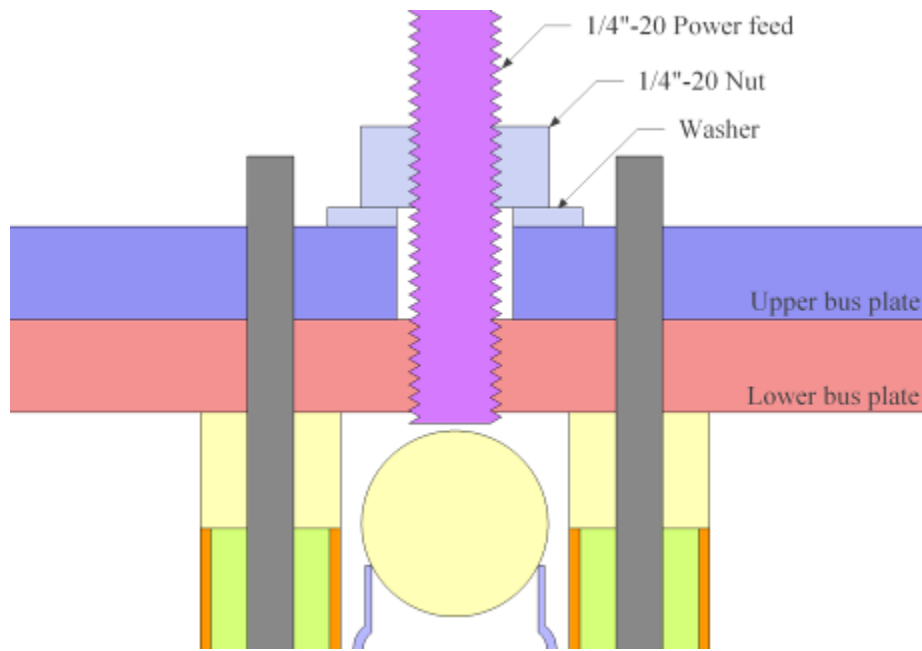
Cross-sectional detail drawing of the top electrical connection from the power feed into the heater electrical pins
